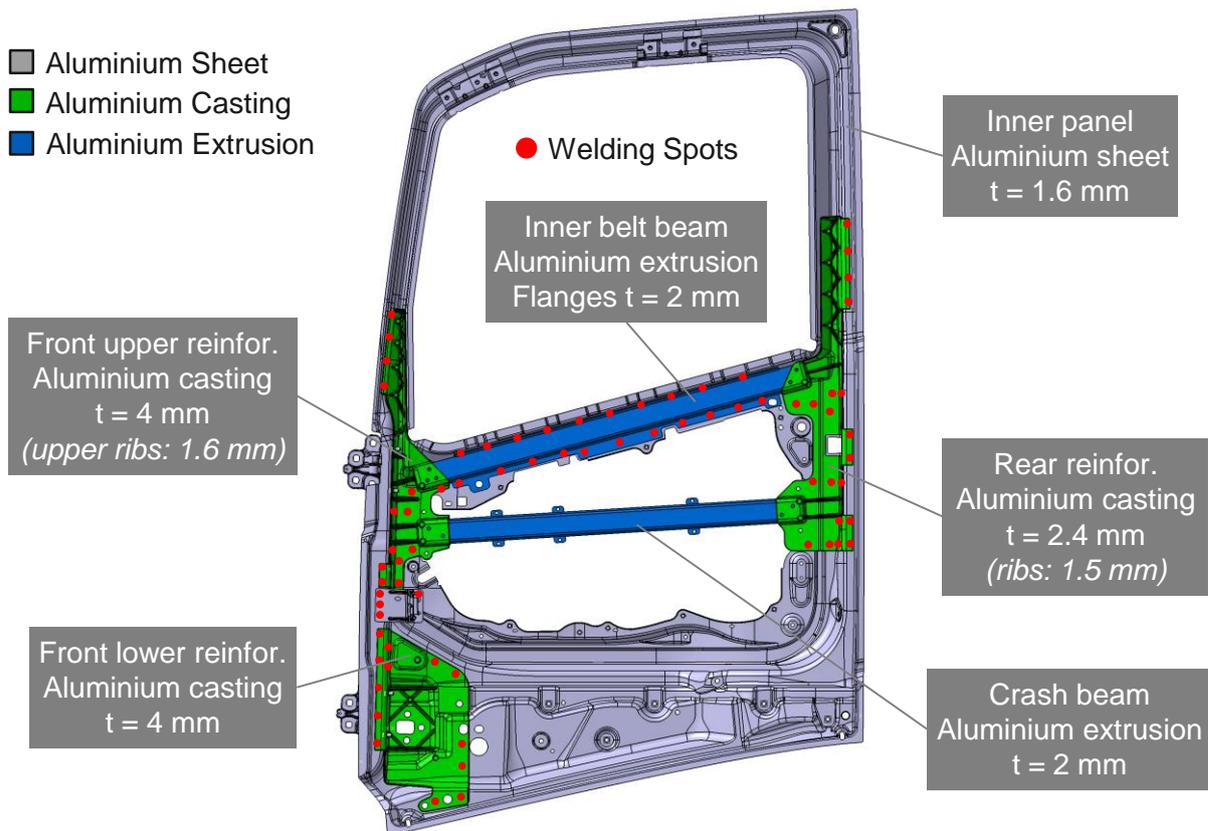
Components to Inner Panel - Overview joining constellations
